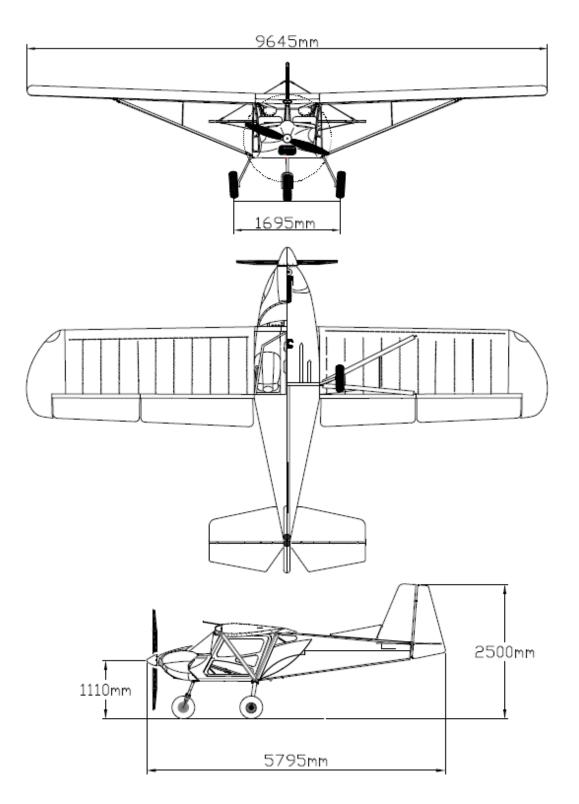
Dimensions - Bushcat Nose-Wheel
